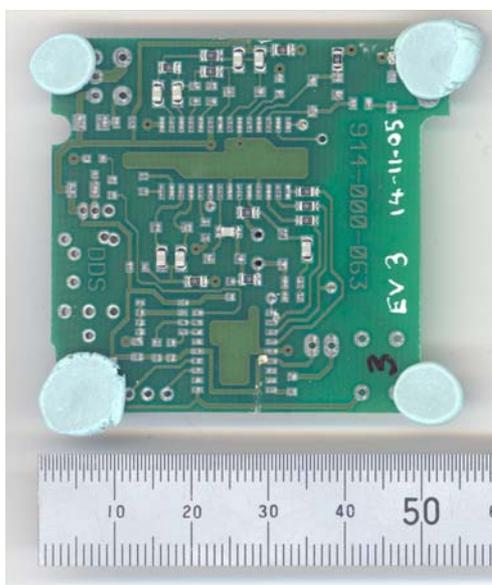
Spur manufactured board (EV3), after thermal cycling.
